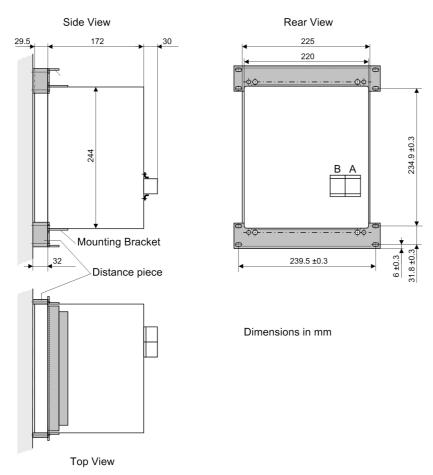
Dimensions of 20 Hz Bandpass Filter 7XT3400-0BA00 for Panel Surface Mounting
